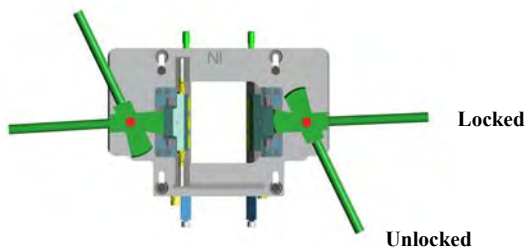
Inner nozzle clamping device rotary wedges pressing rockers in locked and unlocked positions
